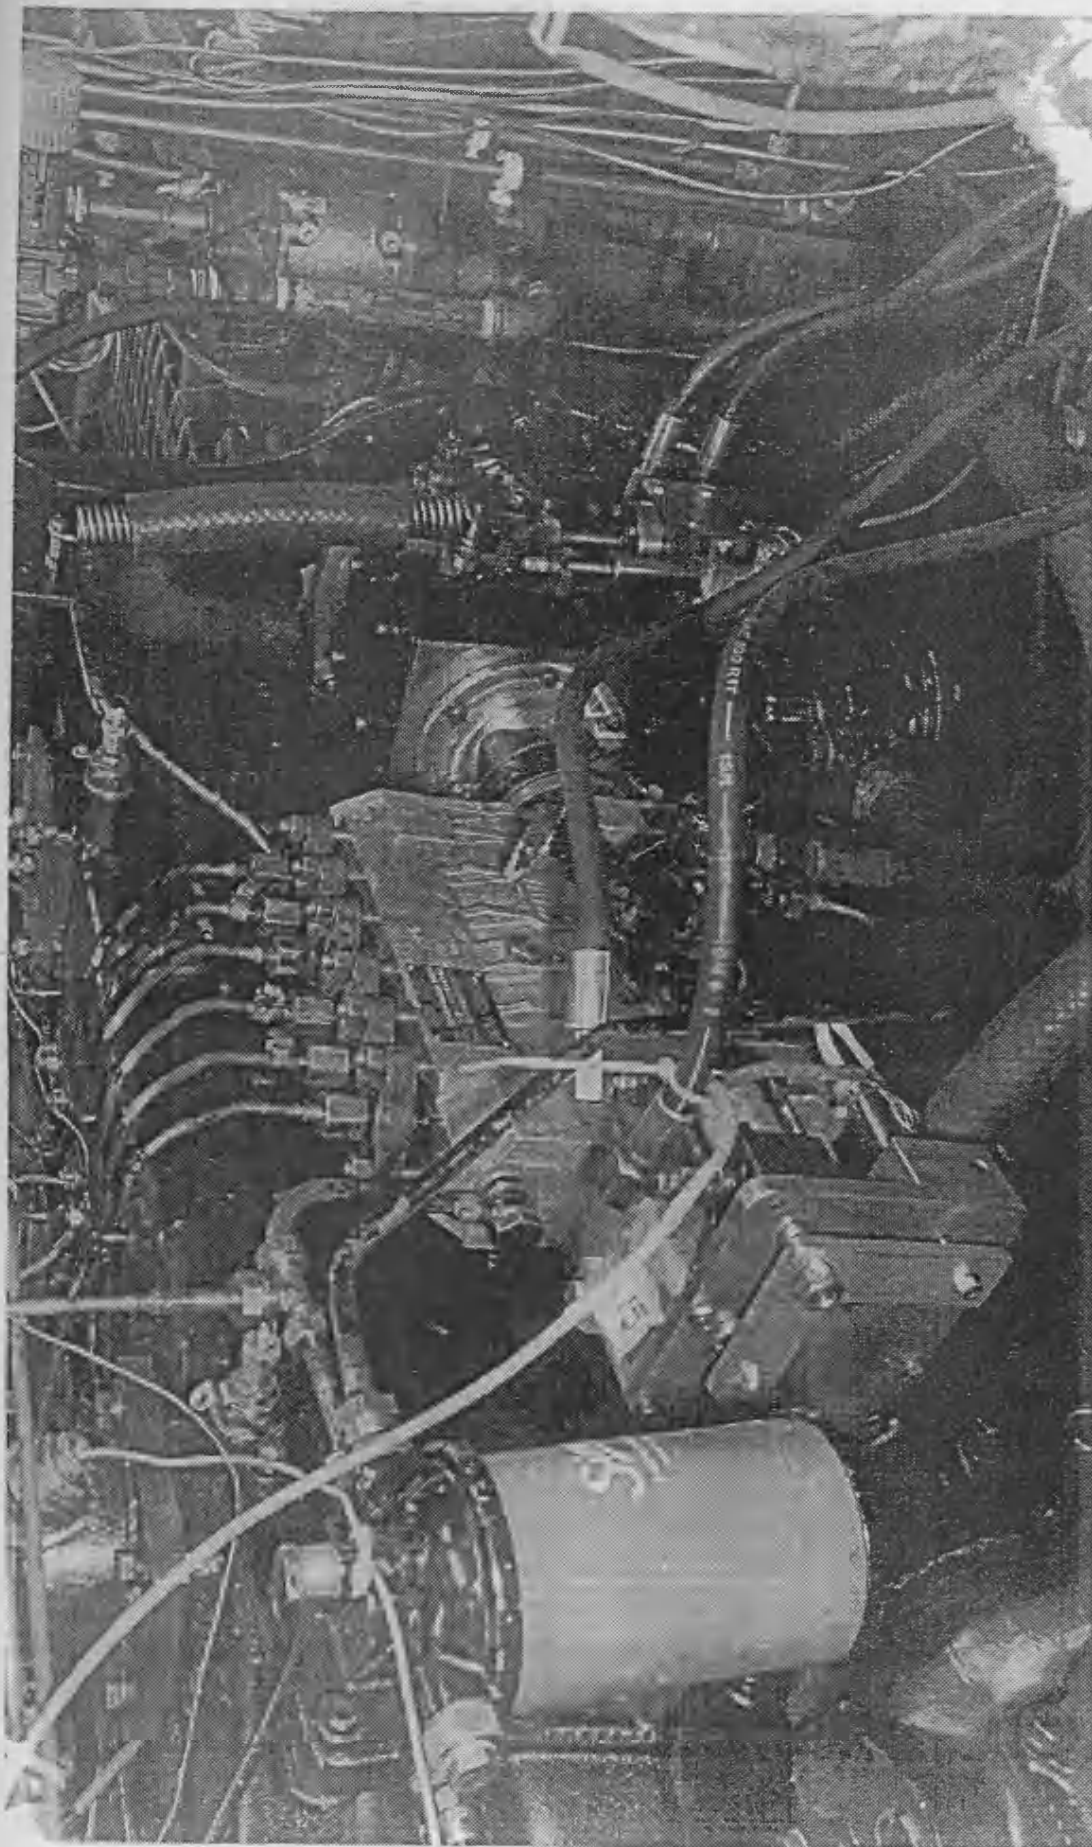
VIEW OF FUEL RACK & INJECTION TIMING ACTUATION ARRANGEMENT
